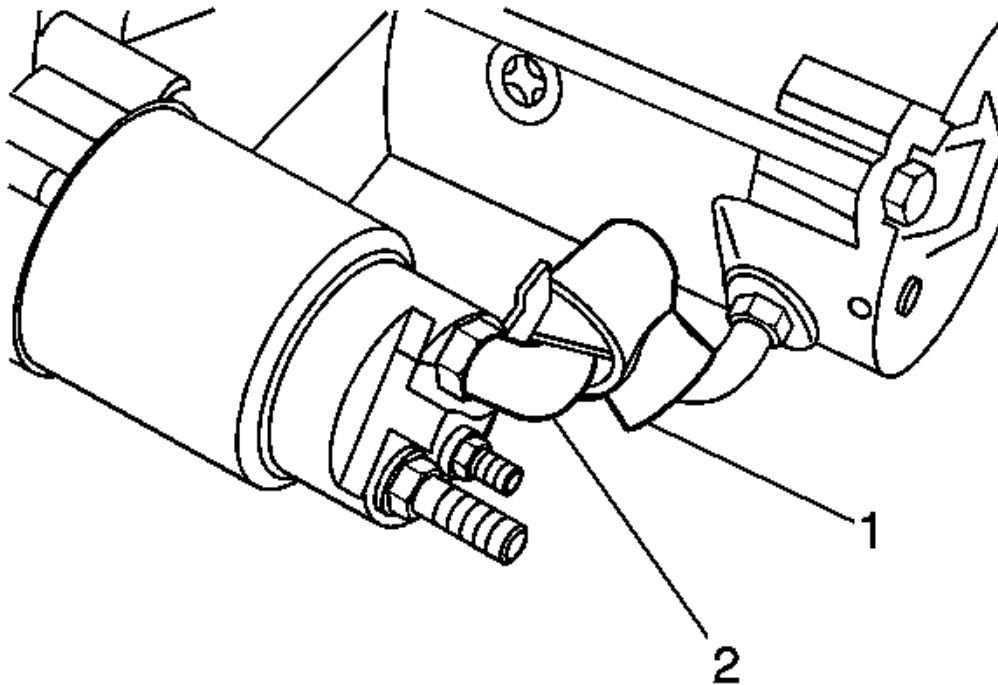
View Of M-Terminal Stud Weather Cover & Epoxy Coating (6.6L (LB7) Engine)
